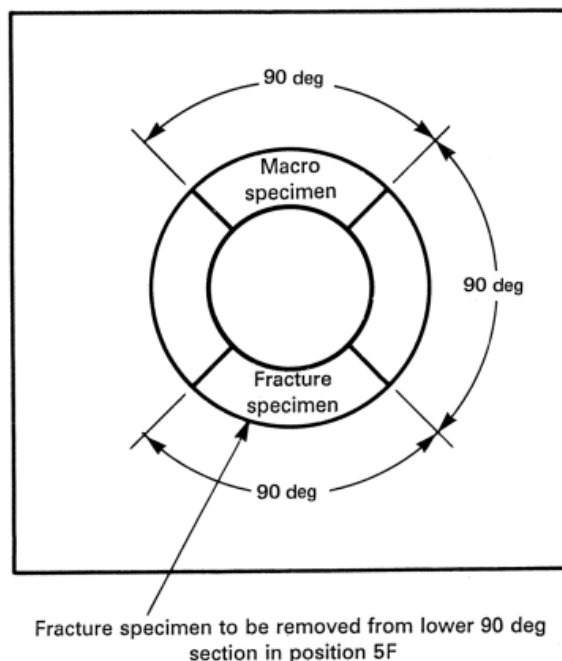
Technical Specimen Retrieval Procedure ASME Section IX for Macro examination QW463.2 (h)
